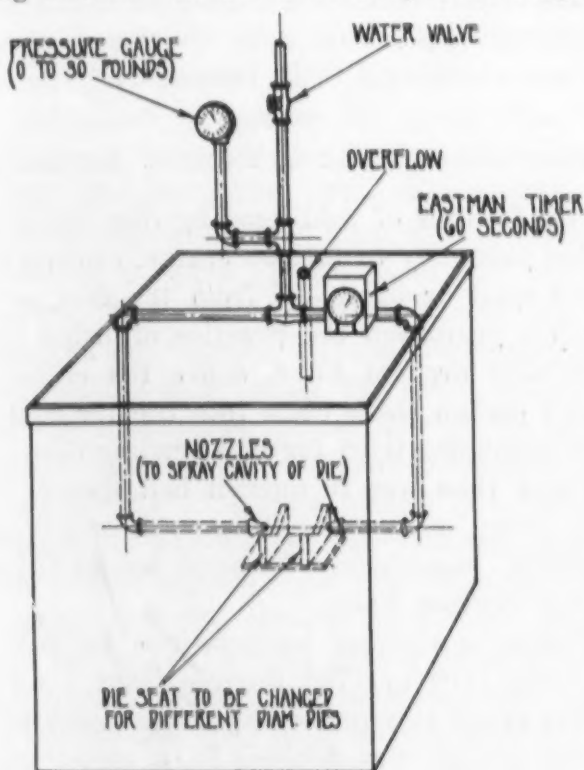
Sketch of Water Spray Quenching Fixture Used for Quenching Double End Cold Heading Dies.
